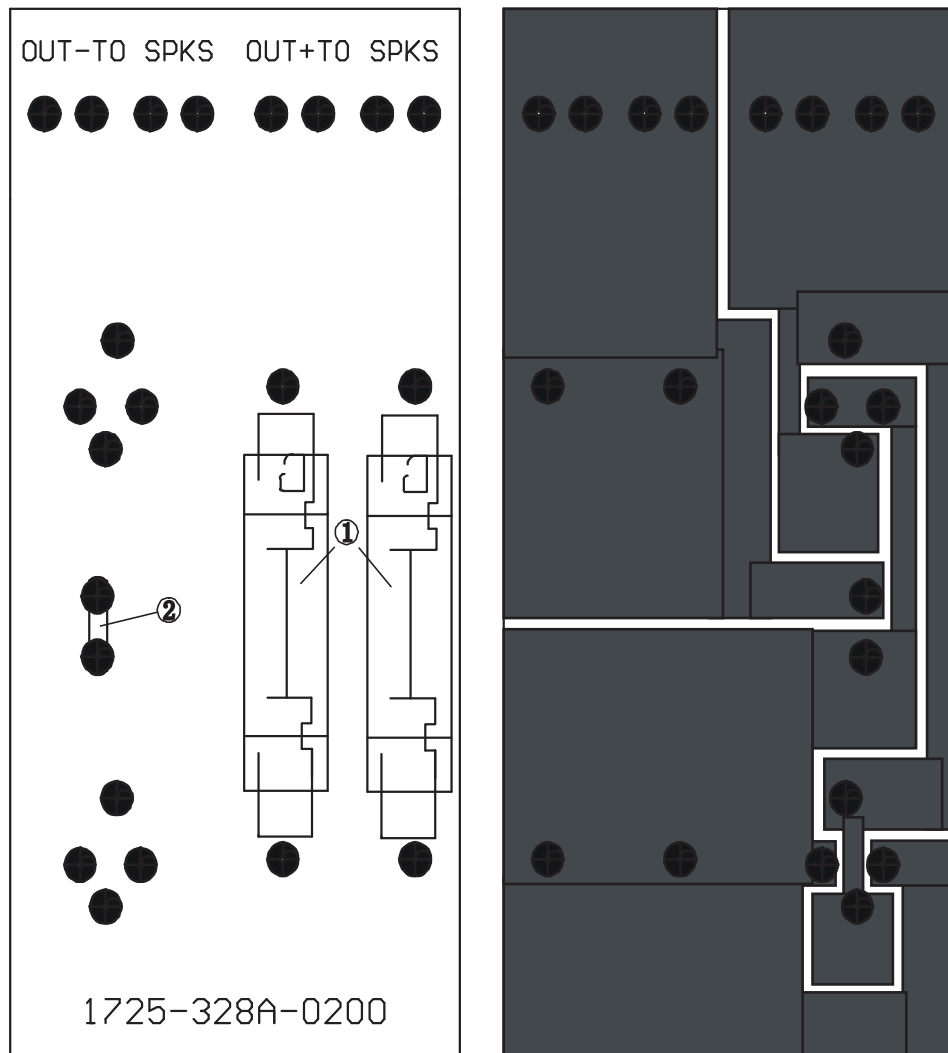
MB4 Bass Loudspeaker Protection Board Layout
